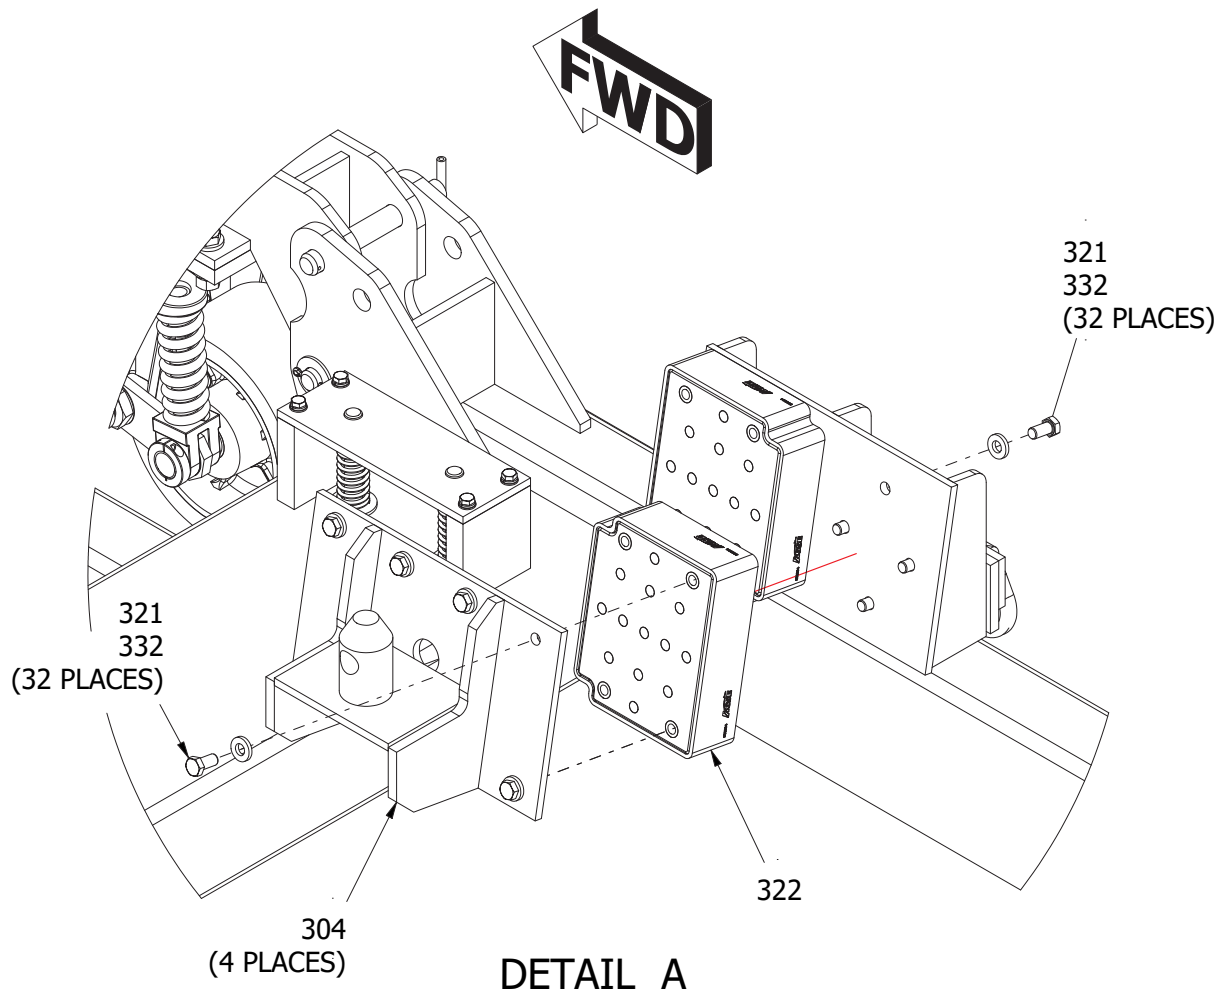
AGSE-E24001-S02 Base Assembly - Shock Mount
